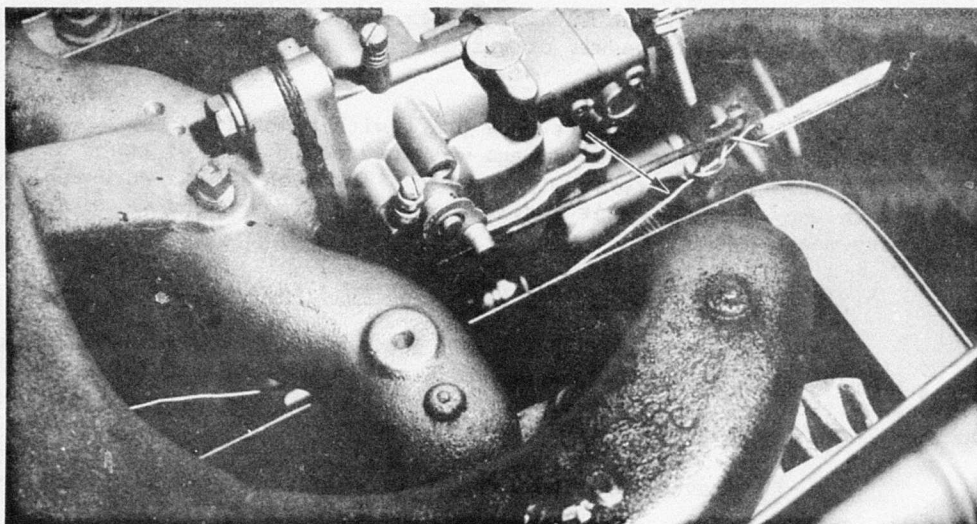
SAFETY WIRE INSTALLED ON VARIABLE-SPEED GOVERNOR CONTROL ASSEMBLY
